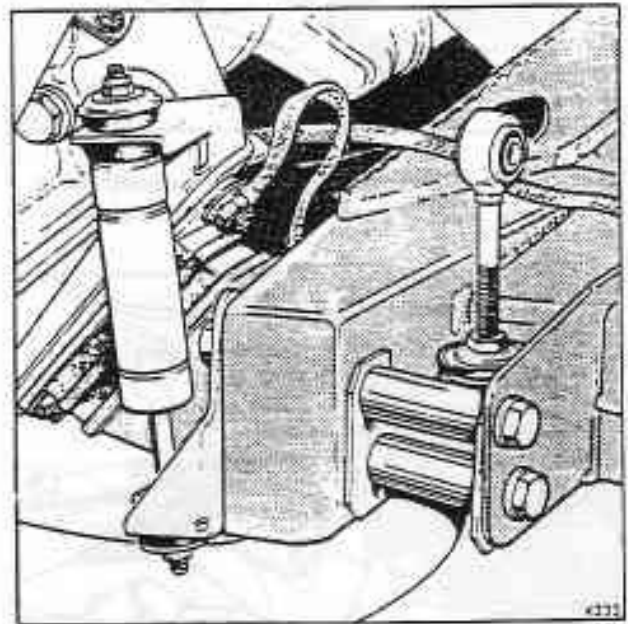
Engine to sub-frame damper fitted to early fuel injection engines only
